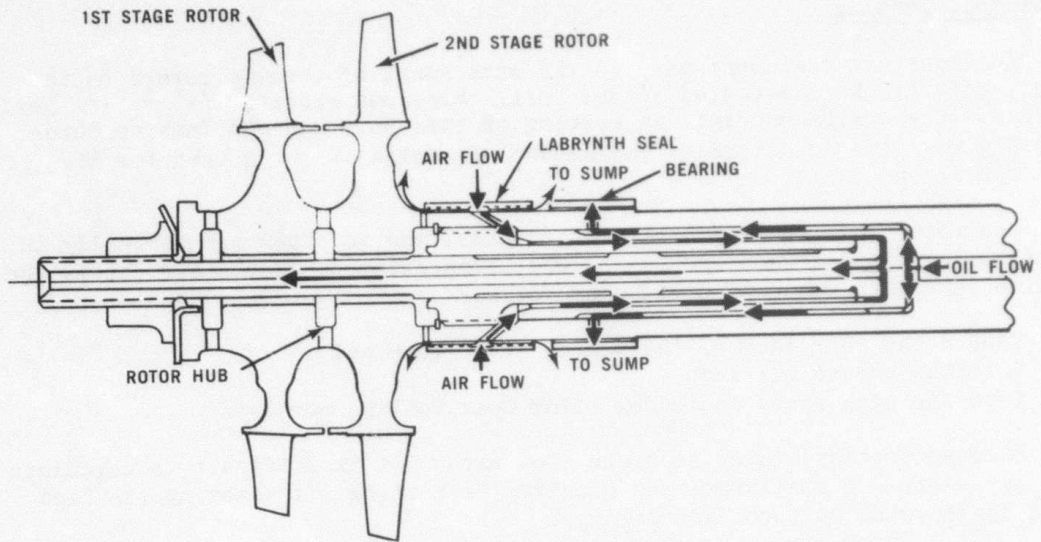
Rotors and Attachment Assembly Illustrating Cooling Air Flow
